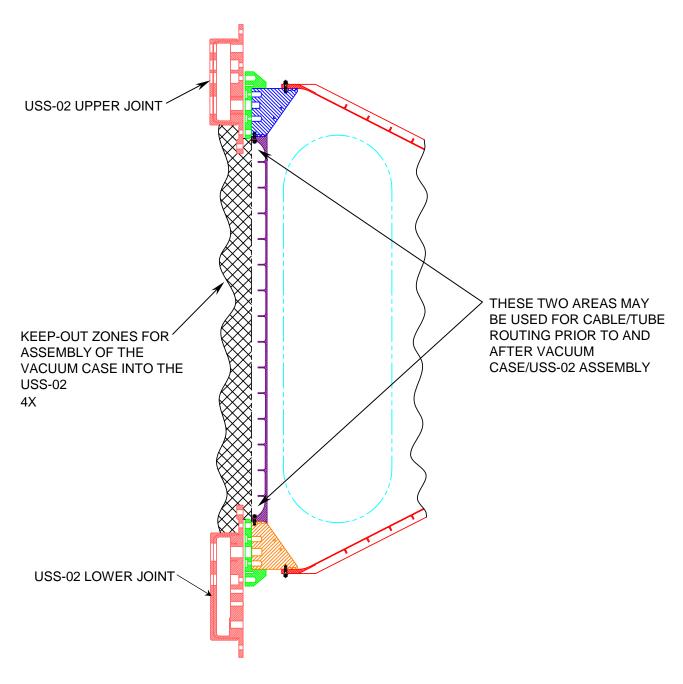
Section View of Keep Out Zone for the VC/USS-02 Assembly
